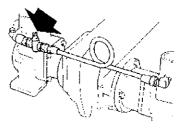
Trickle-feed cock. The scribed line should be in line with the pipe when the cock is open
